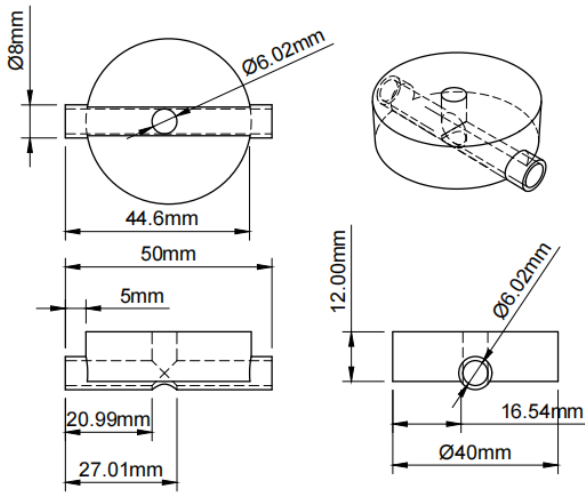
Pin-lock system design using AutoCAD Tinker CAD (Autodesk, Inc., USA).
